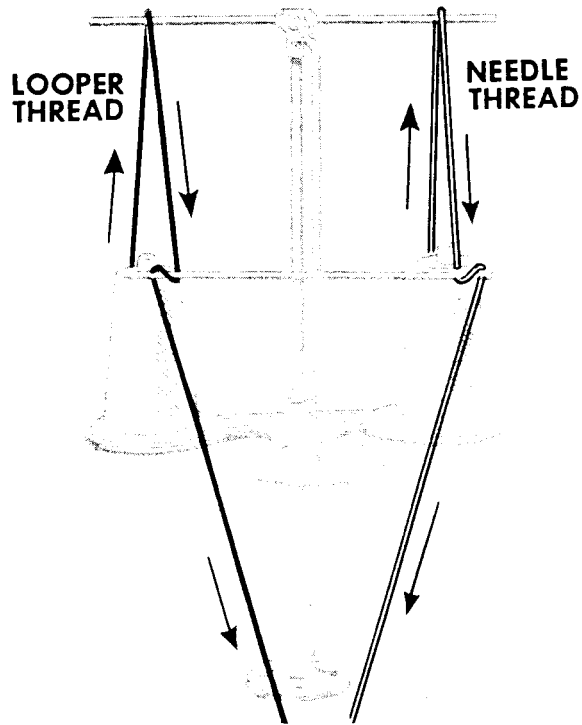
Unwinder 151031 Threaded for Two-Thread Stitch
